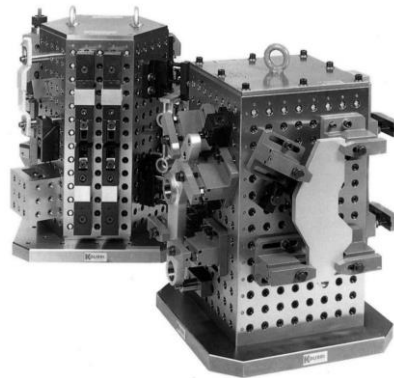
Pallets with vertical clamping surfaces and interchangeable clamping elements
